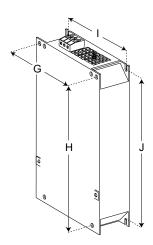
Mounting dimensions of line reactor, frame sizes FSB and FSC
